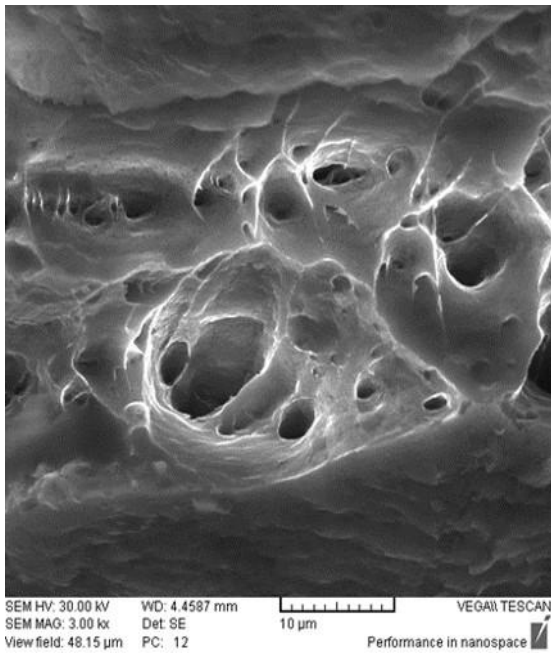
Tensile fracture surfaces of initial sample Al 1050
